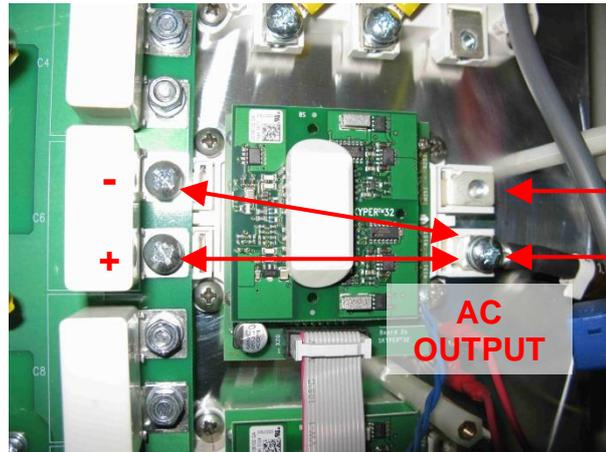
55A IGBT stack assembly IGBT test measurement points
